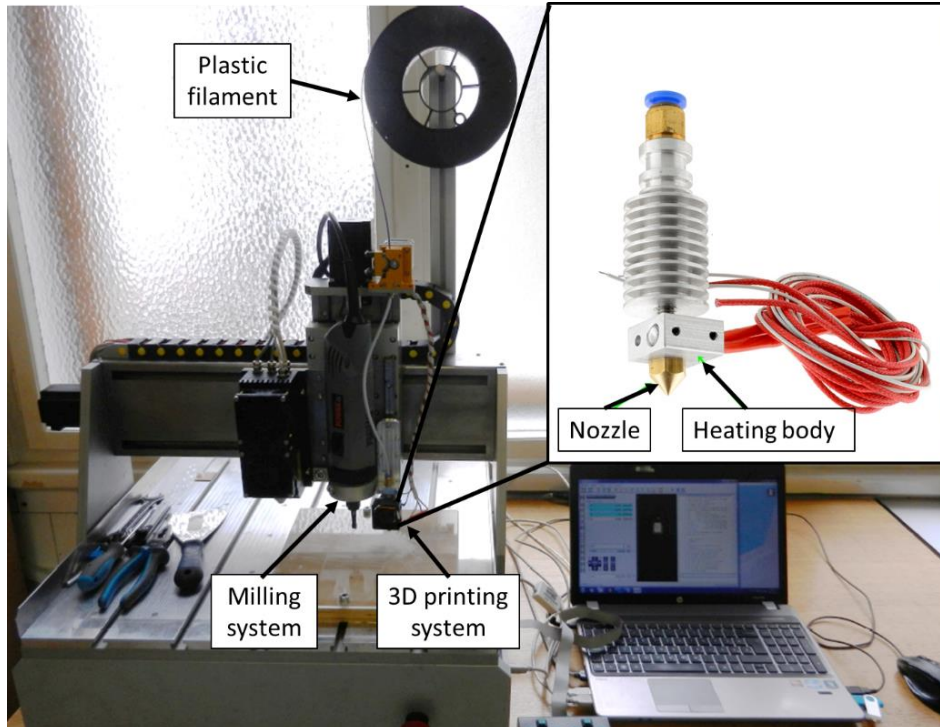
Hybrid manufacturing machine which includes 3D printing and milling systems [6].
